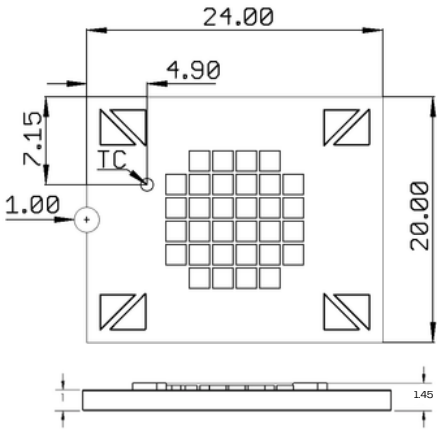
L501A-RGBxxxY Mechanical Drawing
